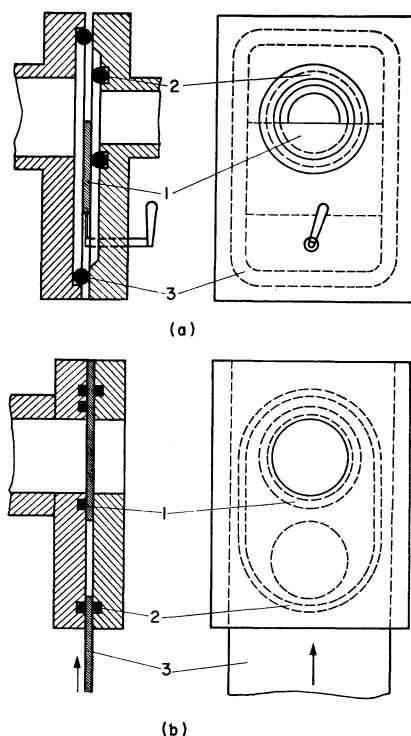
Gate valves with vane: (a) sliding over the O-ring. After Wahl¹²⁸¹ (*Courtesy of The American Institute of Physics*); (b) seated on the O-ring. After Graziotti⁴⁷² (*Courtesy of Société Française des Ingénieurs et Techniciens du Vide*)
